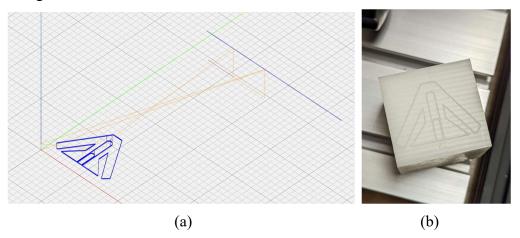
a) NC Viewer Tool Path Simulation b) Finished CNC Cut
